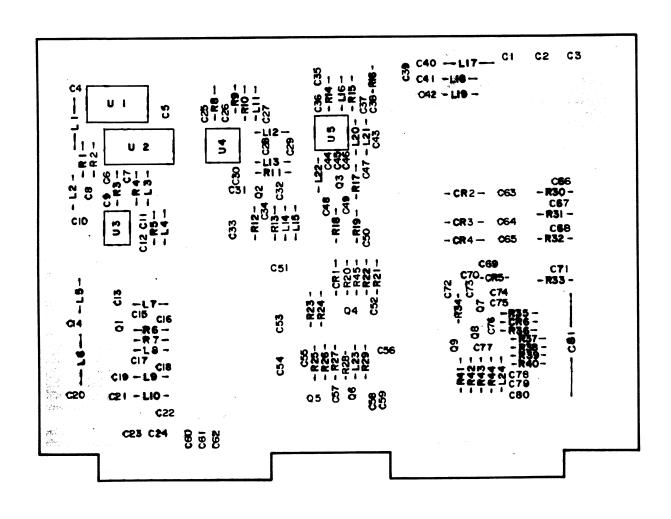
All Voltage Controlled Oscillator Board Assembly Component Locations.
